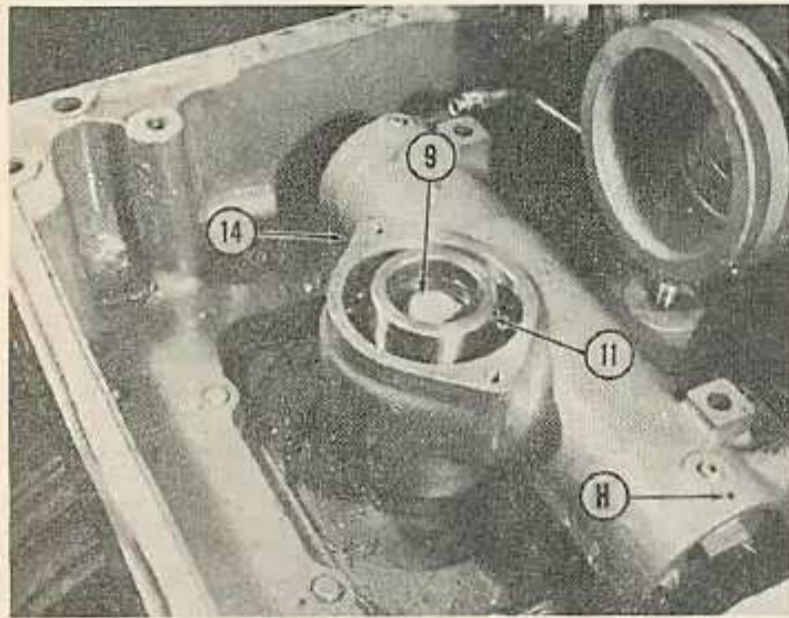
View showing power steering cylinder on Row Crop and Utility models with cylinder cap and pinion plug removed. On Wheatland and Industrial models, cylinder is mounted to front side of front assembly shaft instead of to rear as shown.
